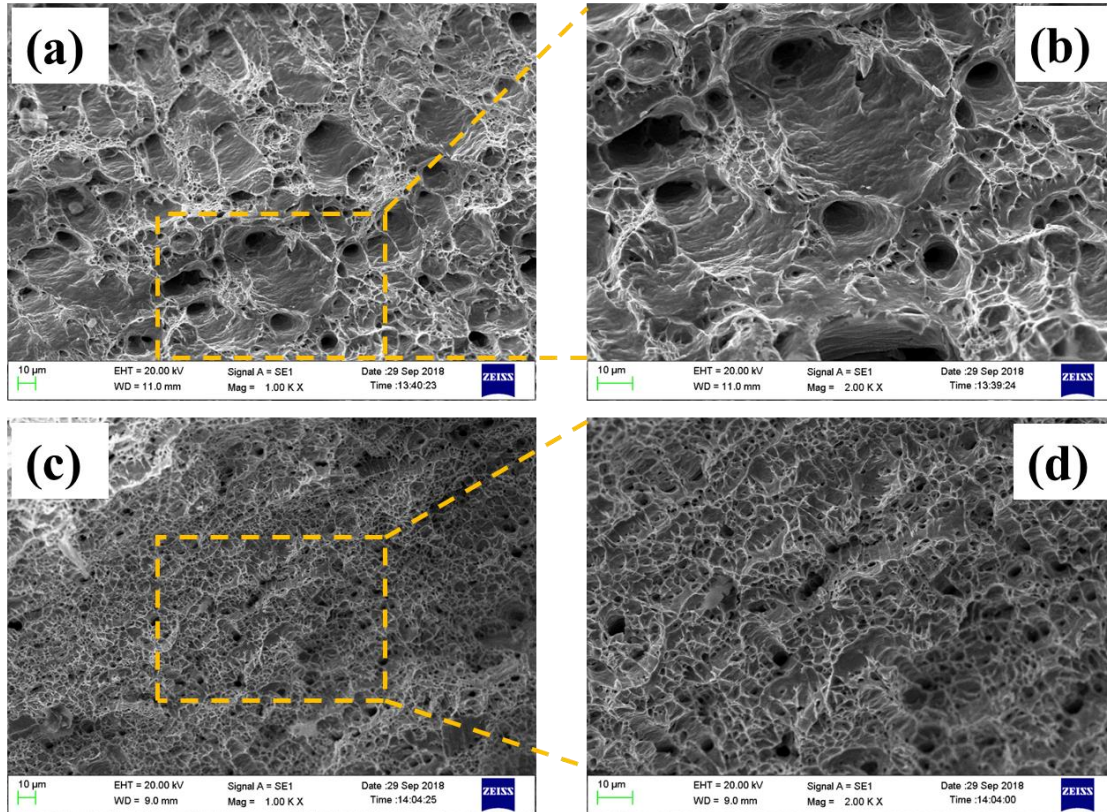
Fractographic surfaces of reduced section tensile sample of (a,b) base metal and (c,d) welded plate S7.
